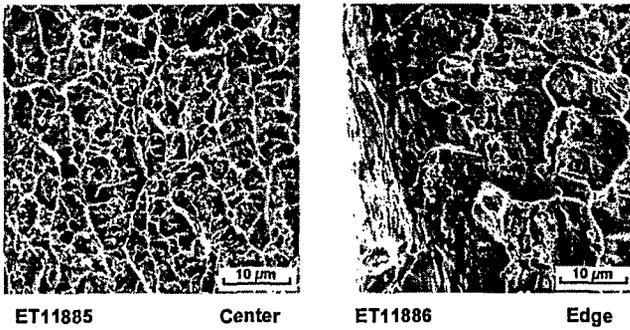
SEM photograph of the center and edge of the fracture surface of the welded In 718 specimen tested in Hg.
